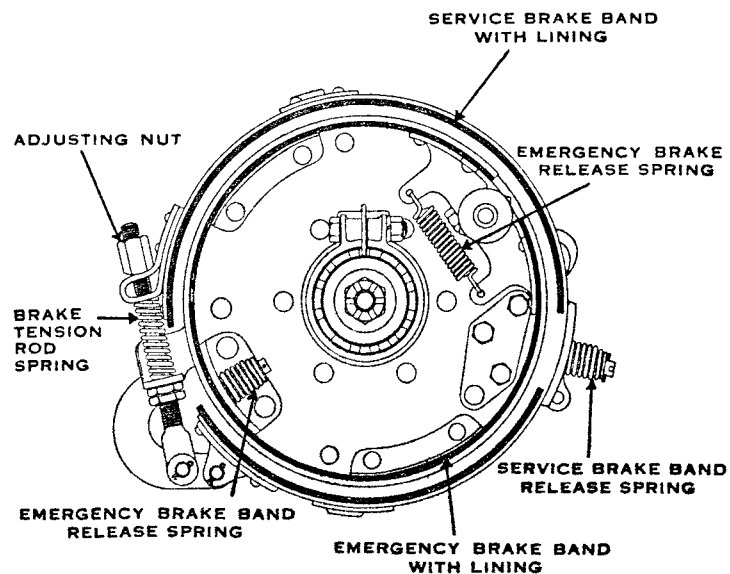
B—Two Wheel Band Type Brakes (Split Type Housing—11" Brakes).
